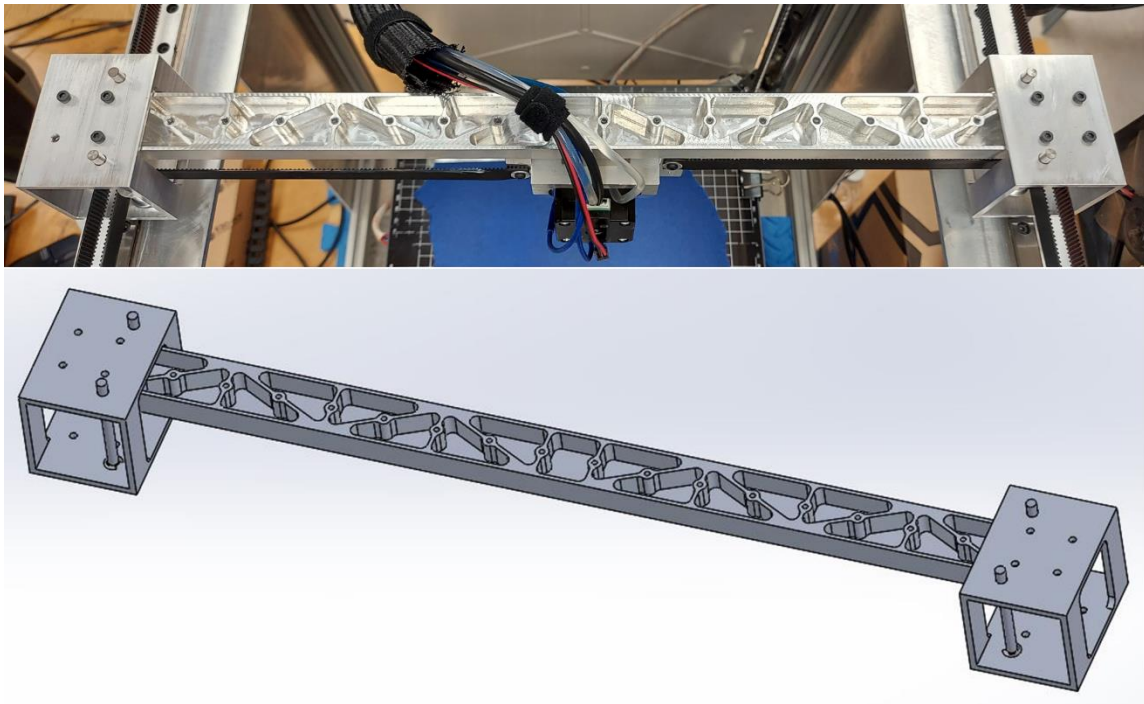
(Top) Gantry as manufactured and (Bottom) CAD model of gantry assembly.
